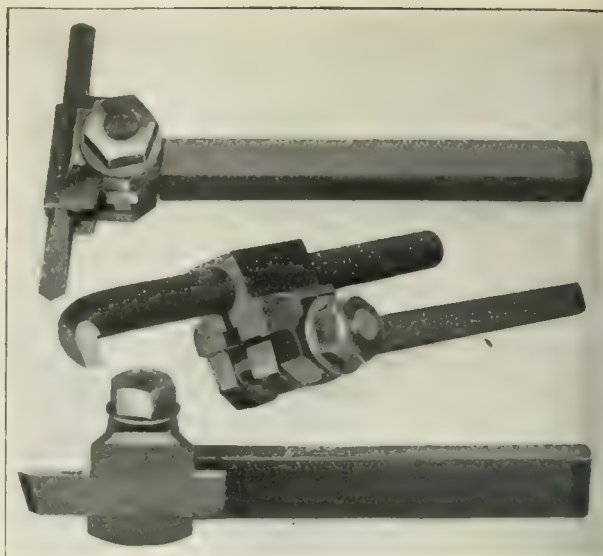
The Spotting or Centering Tool in the Straight-Across-the-Front Position, the Large Boring Bar in Left-Hand Side Position, and a Threading Tool in the Right-Hand Side Position.
